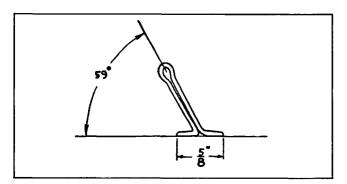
Tool for Removing Upper Half of Main Bearing
